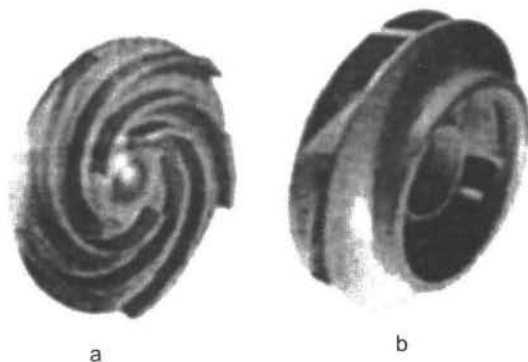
(a) open impeller (b) shrouded impeller.
